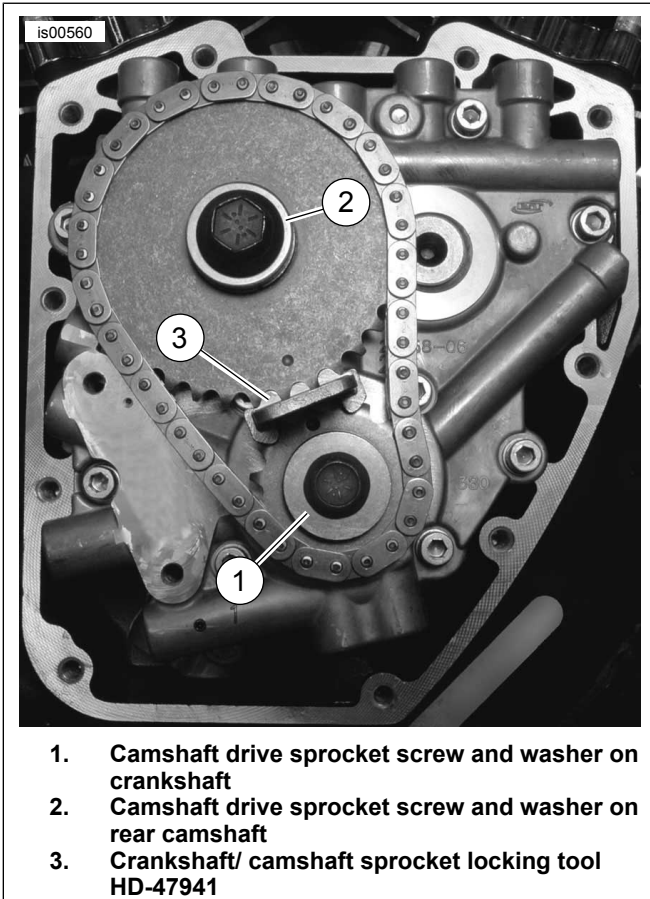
Camshaft Drive Sprocket Attaching Hardware and Locking Tool
